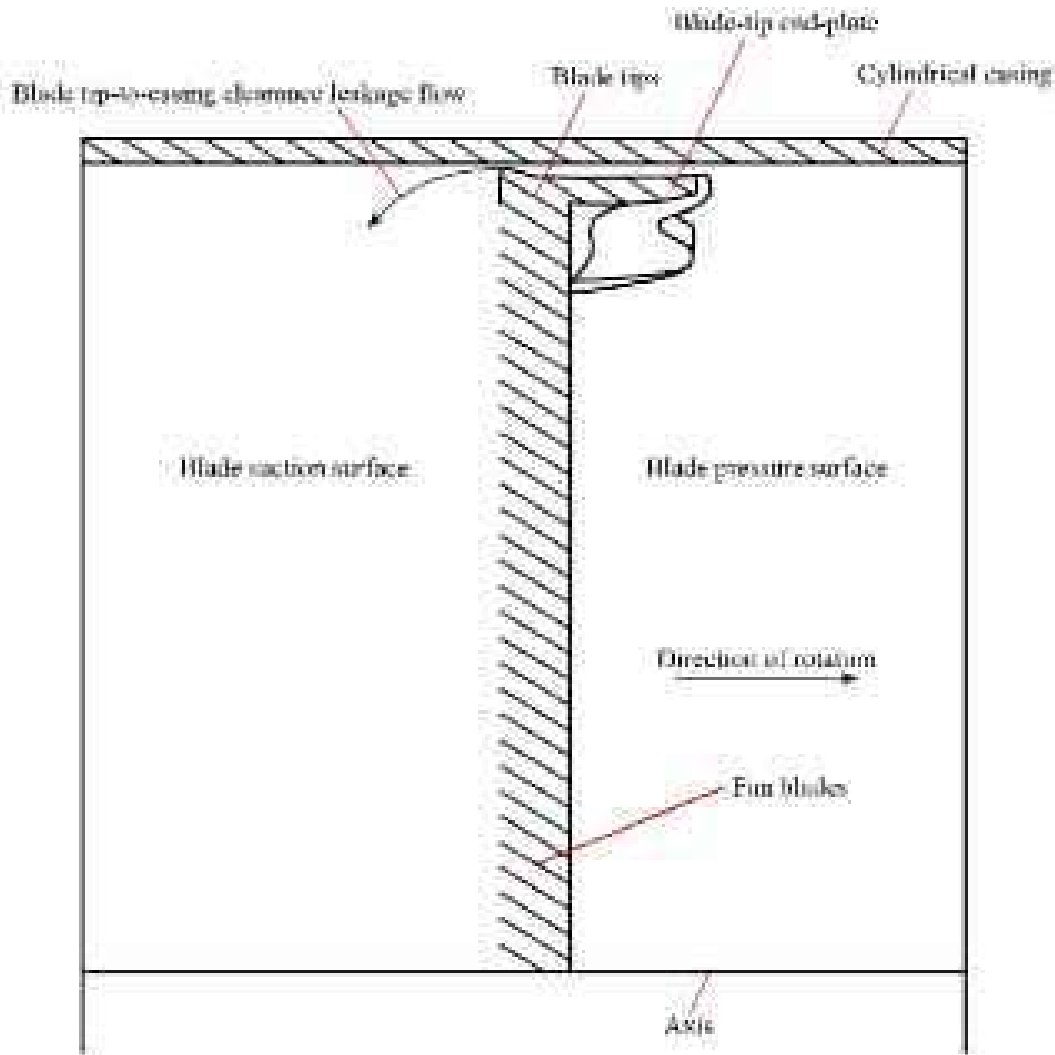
An axial section through a fan blade within the cylindrical casing, illustrating the blade-tip end-plate design.
